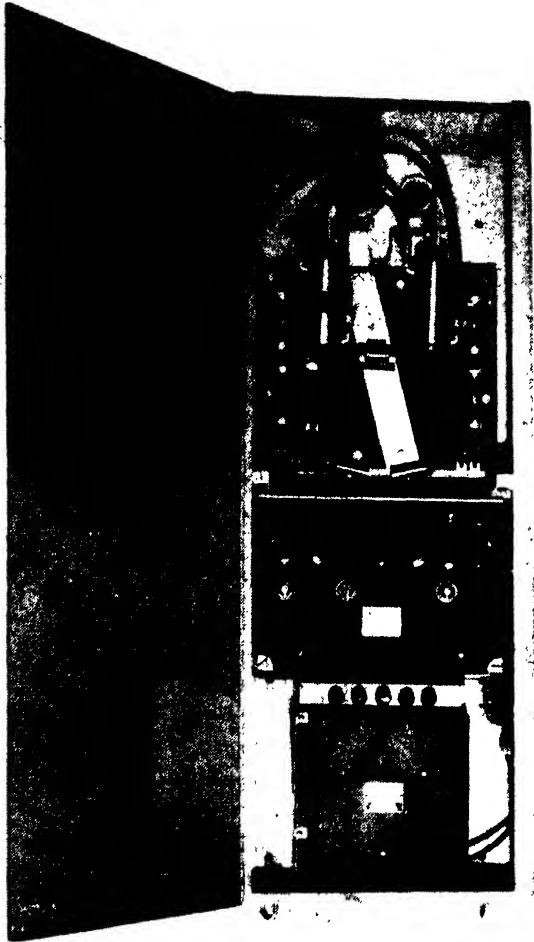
The GE CR7503C121 resistance-welder control panel.
